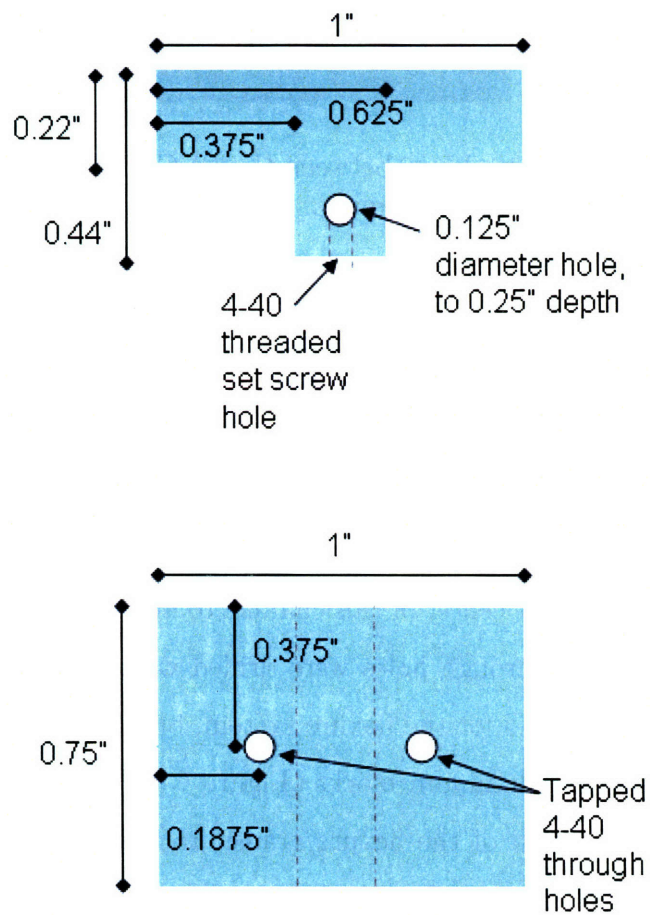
T-shaped aluminum fixture for flexure and transit rod (Figure C-3, part C).
